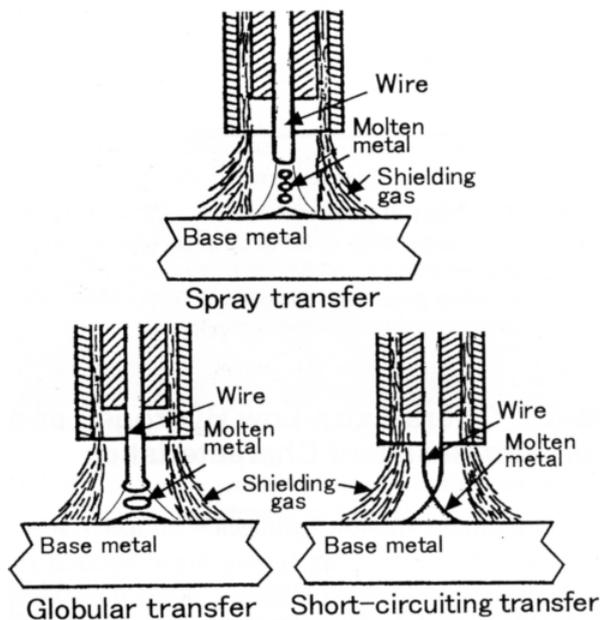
Three major molten metal transfer modes in gas metal arc welding with solid wires
